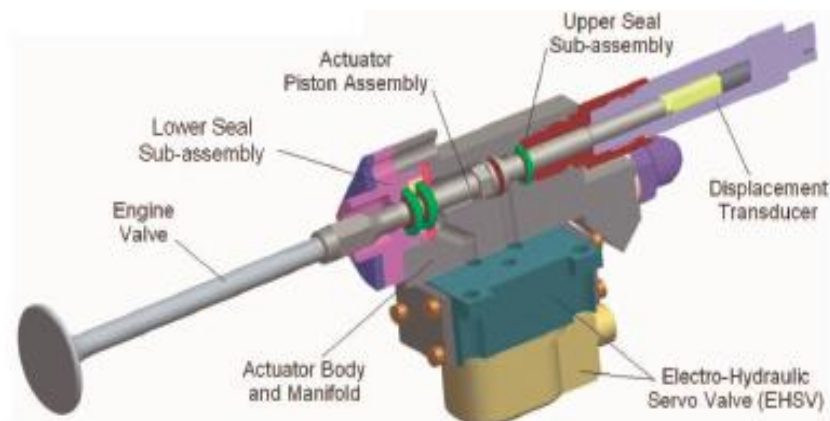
Engine valve, EHSV and displacement transducer assembly [78].
